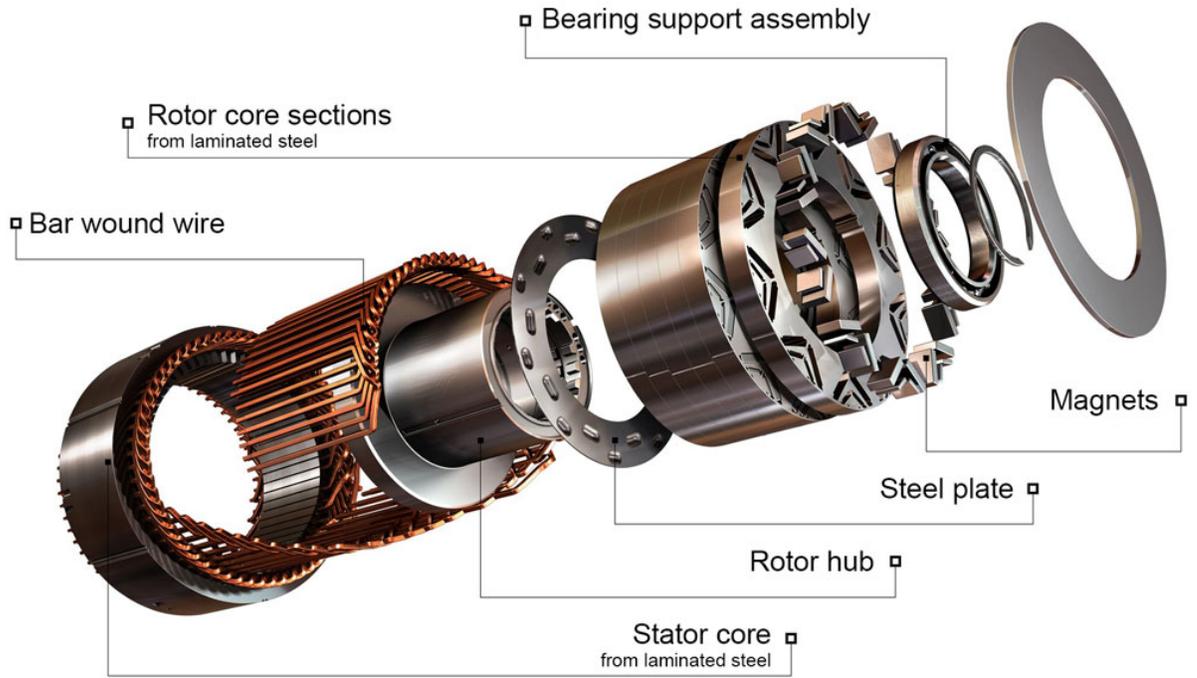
Exploded layout of an interior permanent magnet synchronous motor [62]
